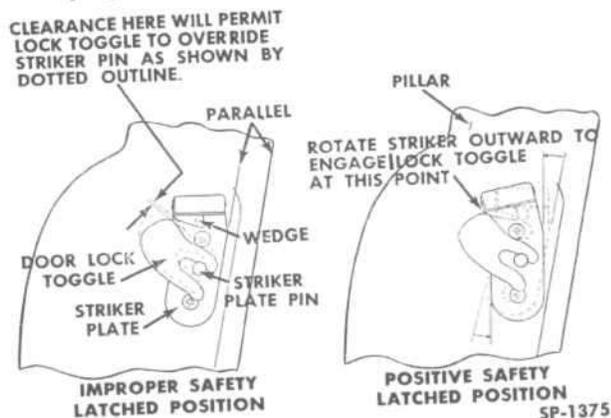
LOCK TOGGLE AND STRIKER PLATE POSITION
